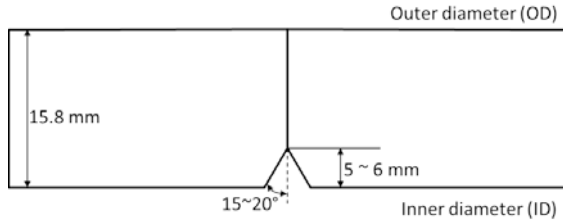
A schematic of the butt joint configuration for root arc welding prior to FSW.
